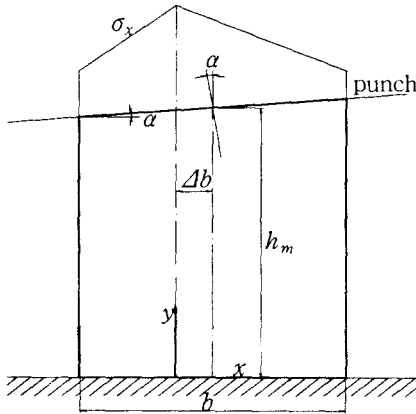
Disturbed lubrication, tool and billet misalignment in upset forging
